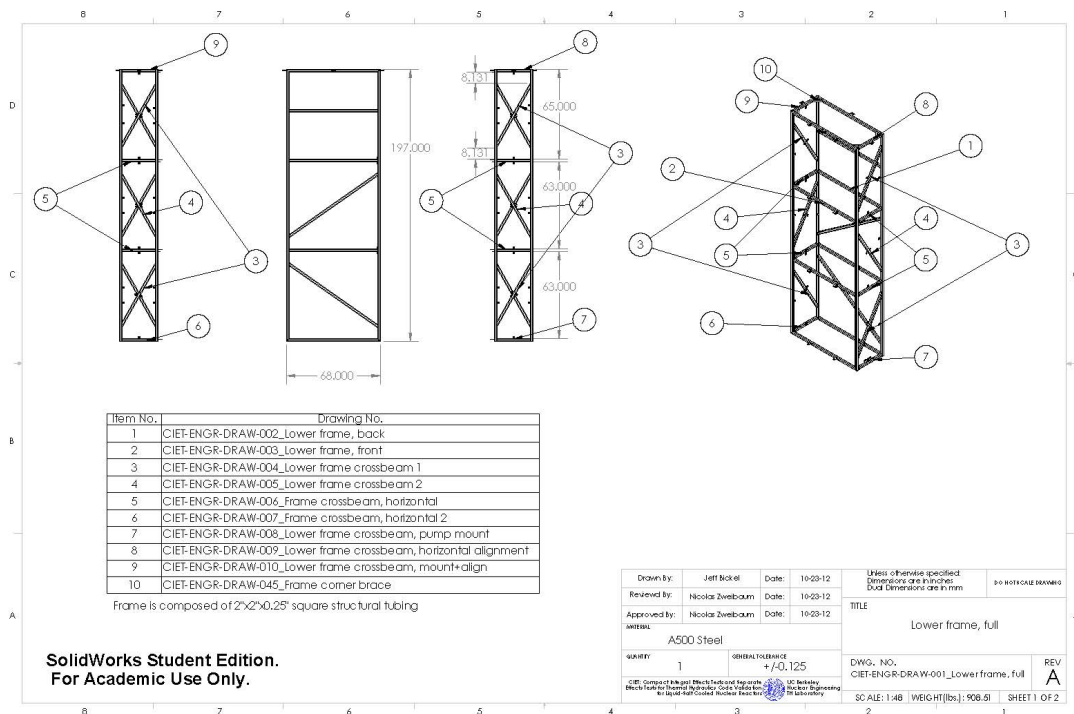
Engineering drawing of the CIET 1.0 lower frame.
